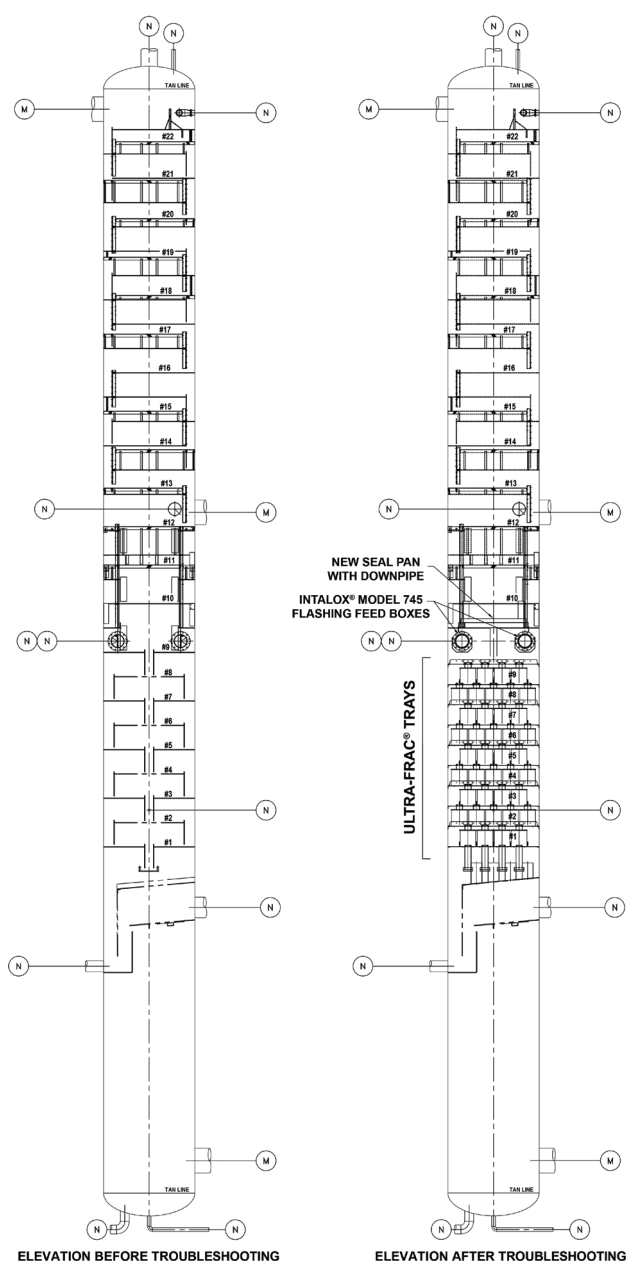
Column elevation after revamp 1Q19 vs column elevation after troubleshooting.
